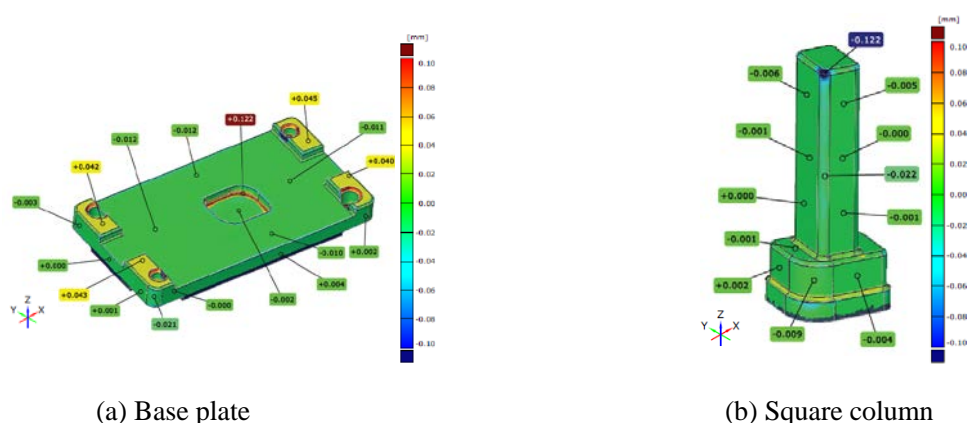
Differences in shape of two separate machined green compacts to CAD data and assemble.
